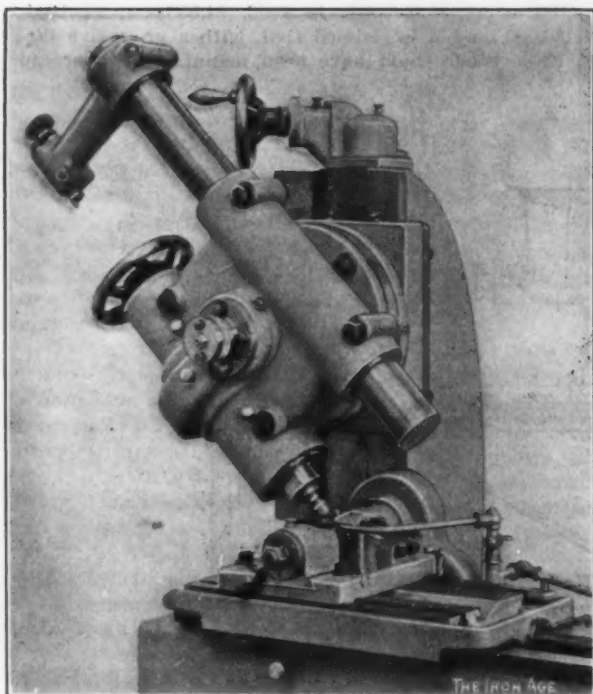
The Setting for Cutting a Small Bevel Gear.
